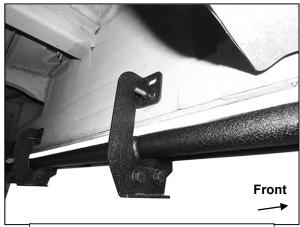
Attach driver/left Running Board to #3, #4 and rear Mounting Brackets
